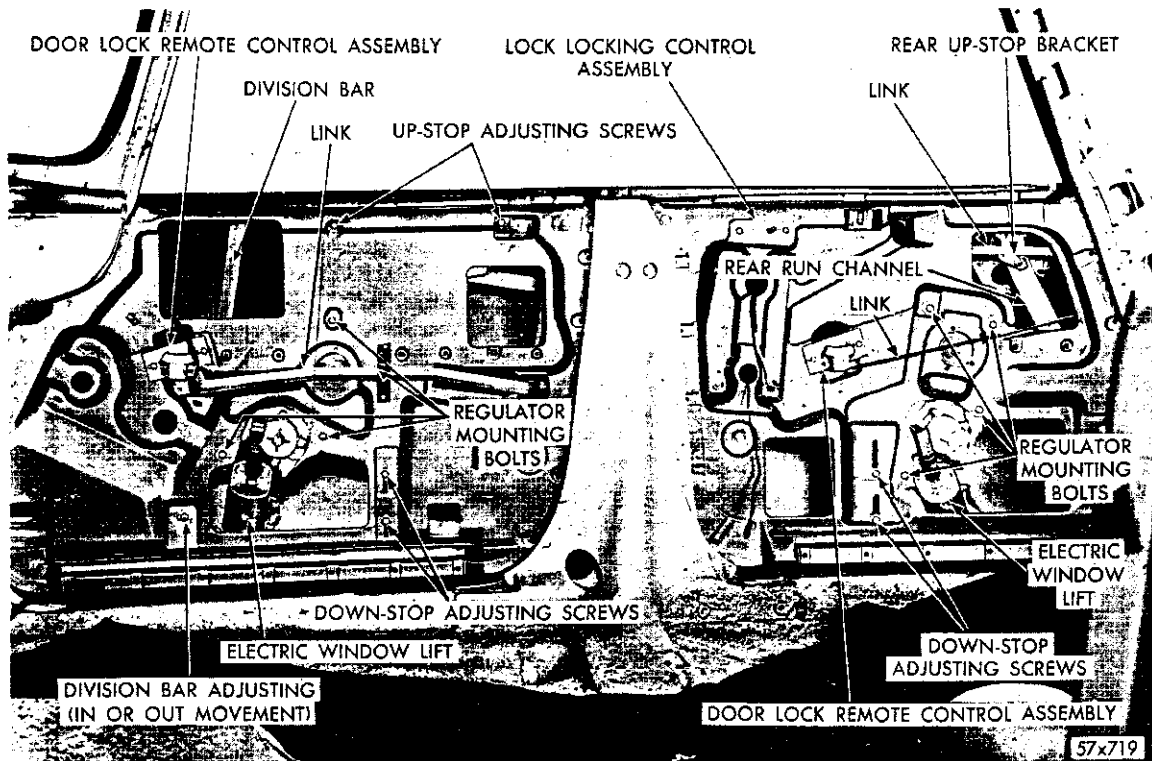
Front and Rear Door Control Assembly (Imperial)
